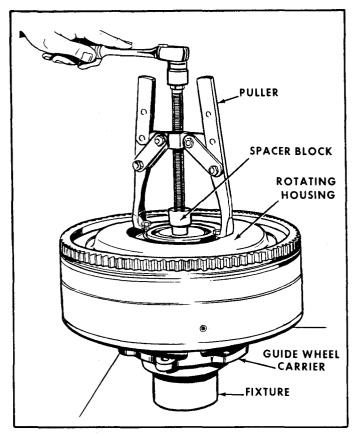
Removing the Rotating Housing from the Impeller Wheel.
